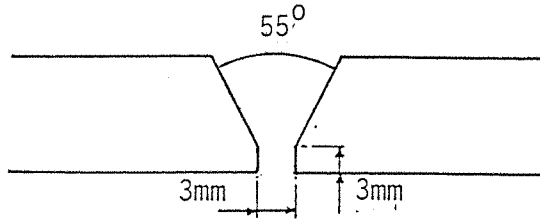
WELD PREPARATION TYPES
